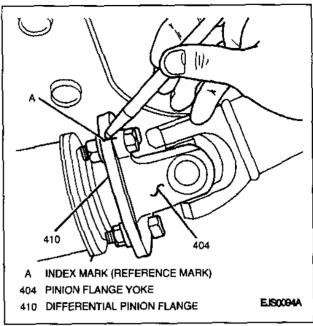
Placing Index Marks on Pinion Flange Yoke and Differential Pinion Flange
